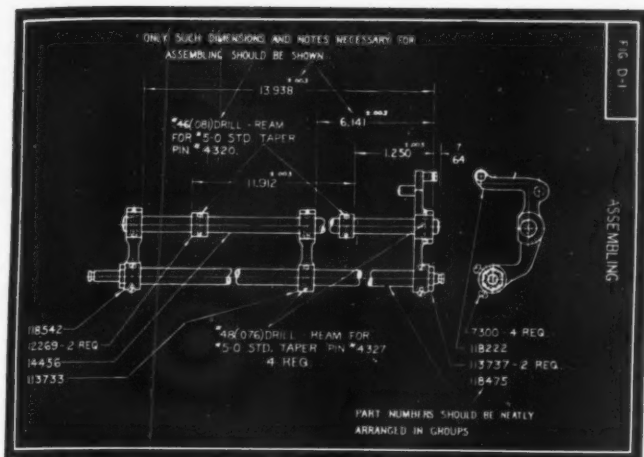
Sample assembly drawing giving only that information which is essential to proper assembly
